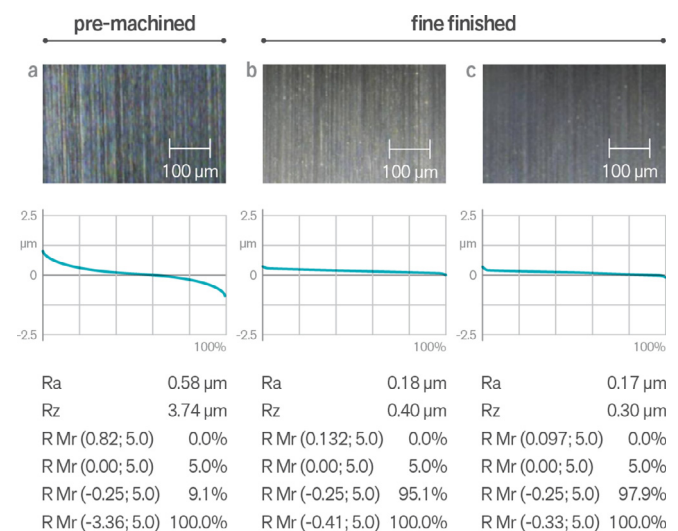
Surfaces in fine-finished tooth flanks (discontinuous profile grinding) depending on wheel specification [87].
